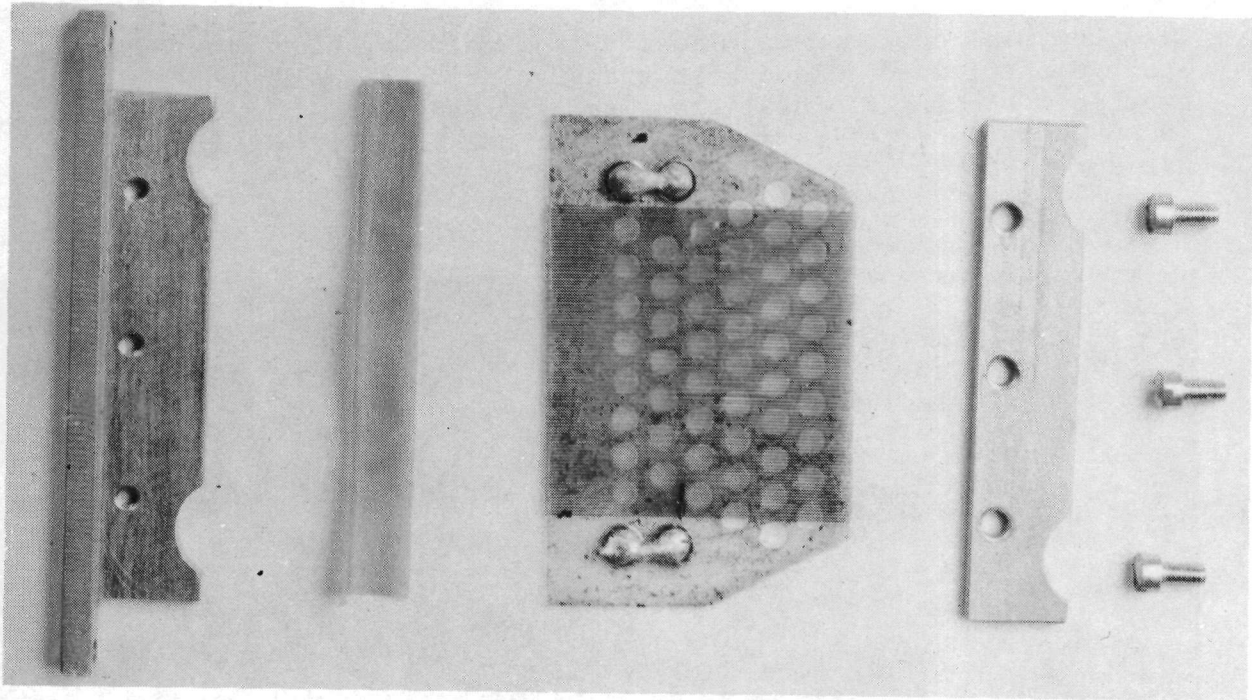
Exploded view of mica card thermopile and cold junction clamp, and heat sink assembly.
